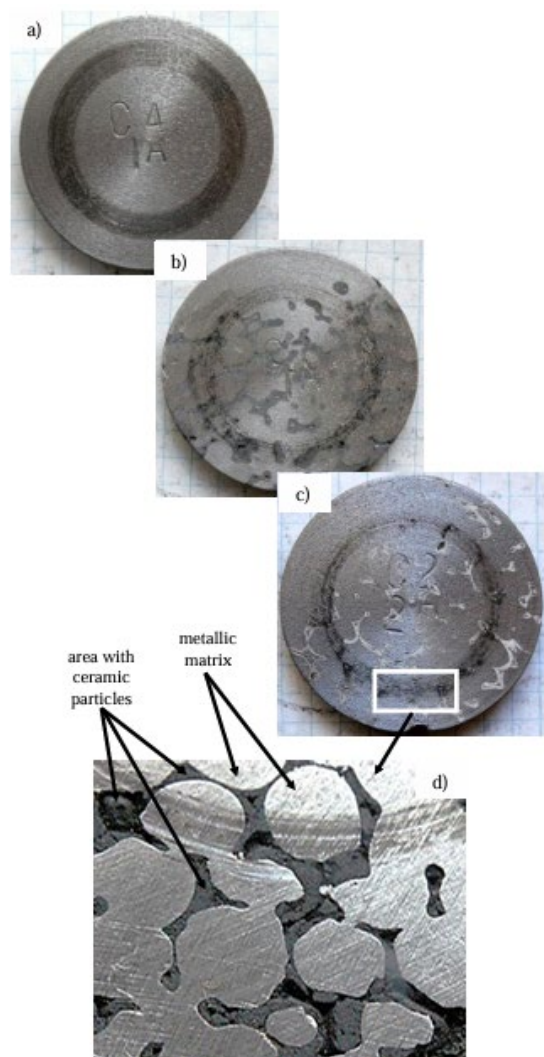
Macrostructure of the specimens: a) EN-GJL-150 cast iron; b) EN-GJL-150+SiC composite; c) EN-GJL-150+Al₂O₃;
